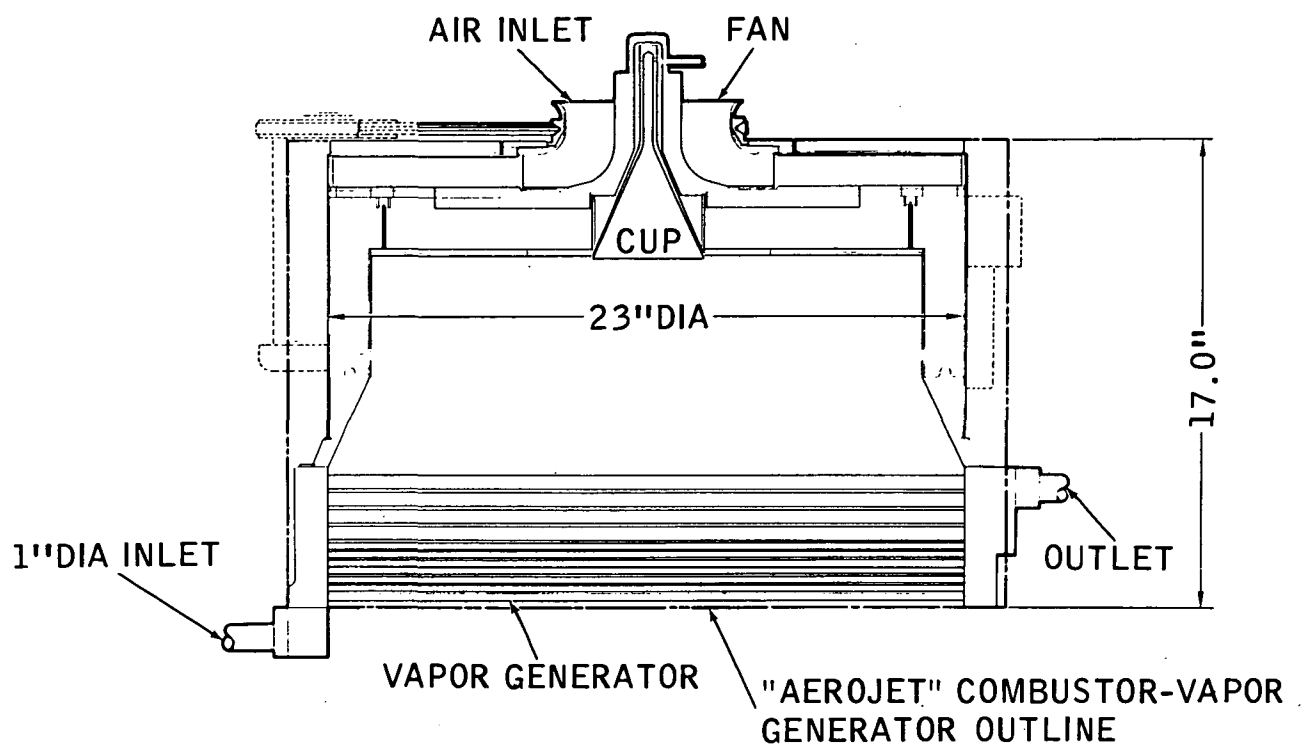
AEF-78 COMBUSTOR/VAPOR GENERATOR (FRONT VIEW)
